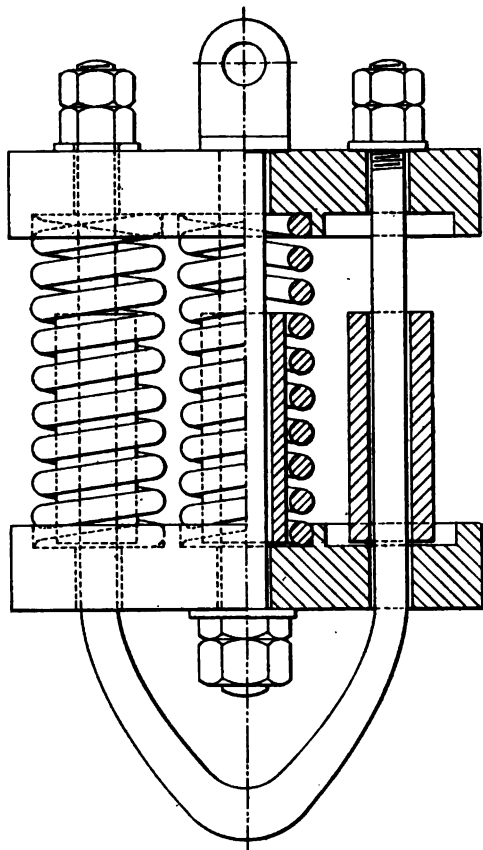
SPRINGS FOR REDUCING SHOCKS TO WINDING ROPES.
